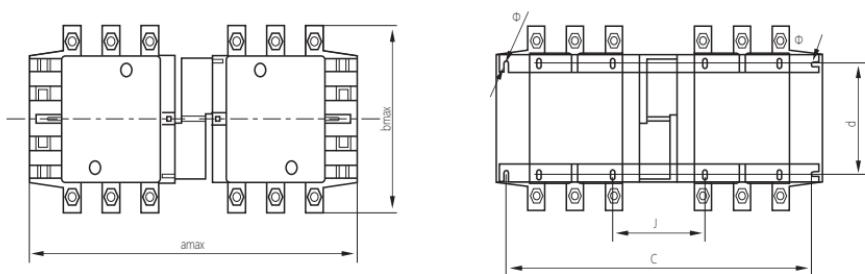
Outline and installation dimensions of NC2-115Ns~800Ns AC contactors
